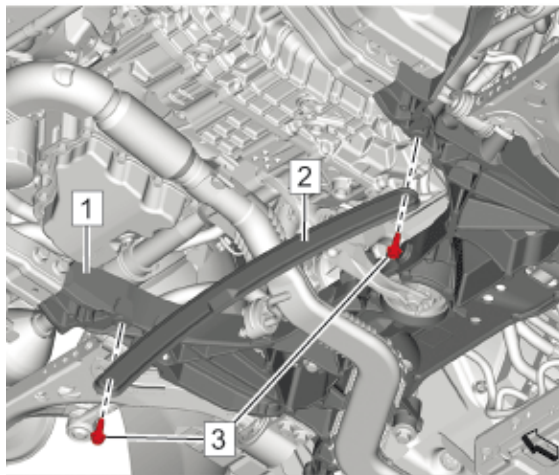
Drivetrain And Front Suspension Cradle, Brace And Bolts
